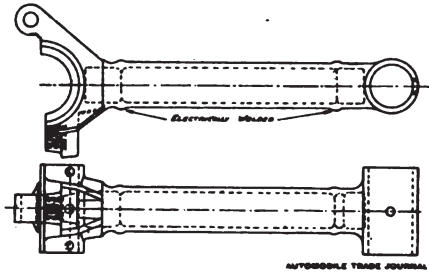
Views of the electrically welded connecting rod of the Brush Runabout. This rod is fitted with a hinged cap at the lower end and is made of three forgings electrically welded into a unit. The big end bearing is fitted with swedged babbit.
